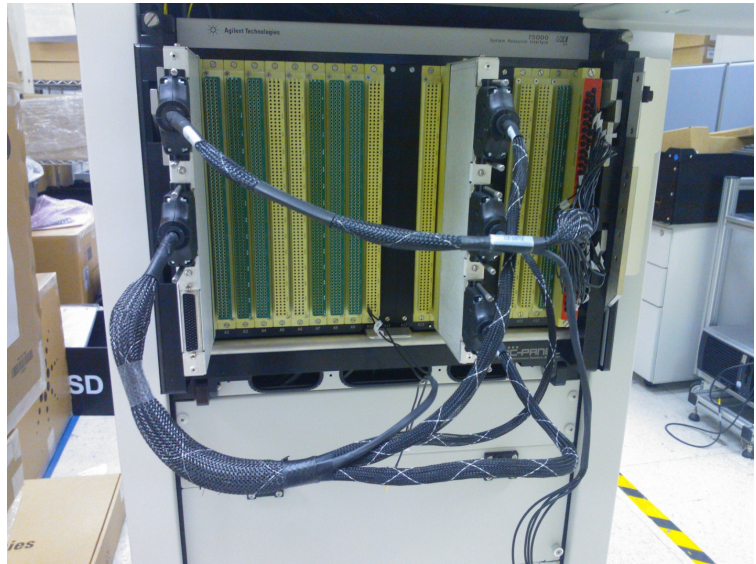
Installing a Universal CEDGN Test Fixture U8972-67901 with a CEDGN HD Load Card Cable U8972-61629
